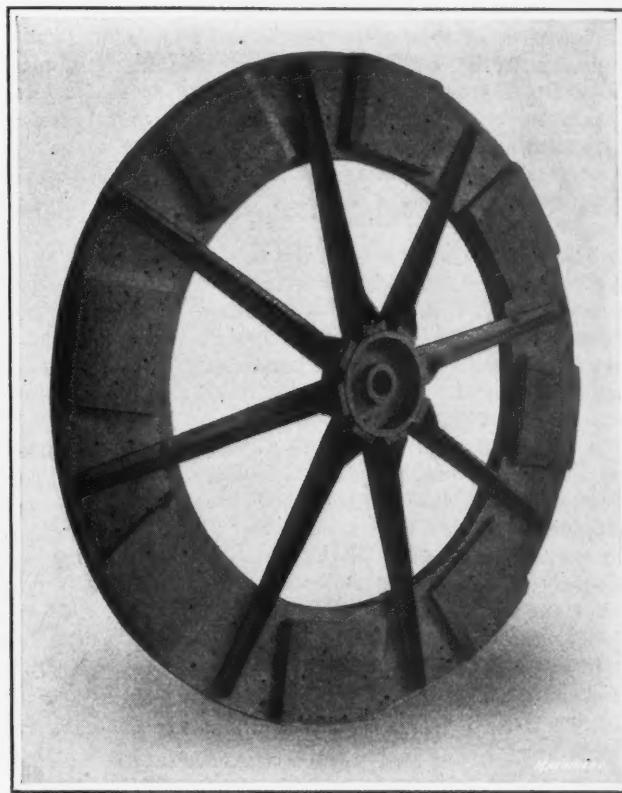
Back View of Faceplate for Patternmakers' Lathe
